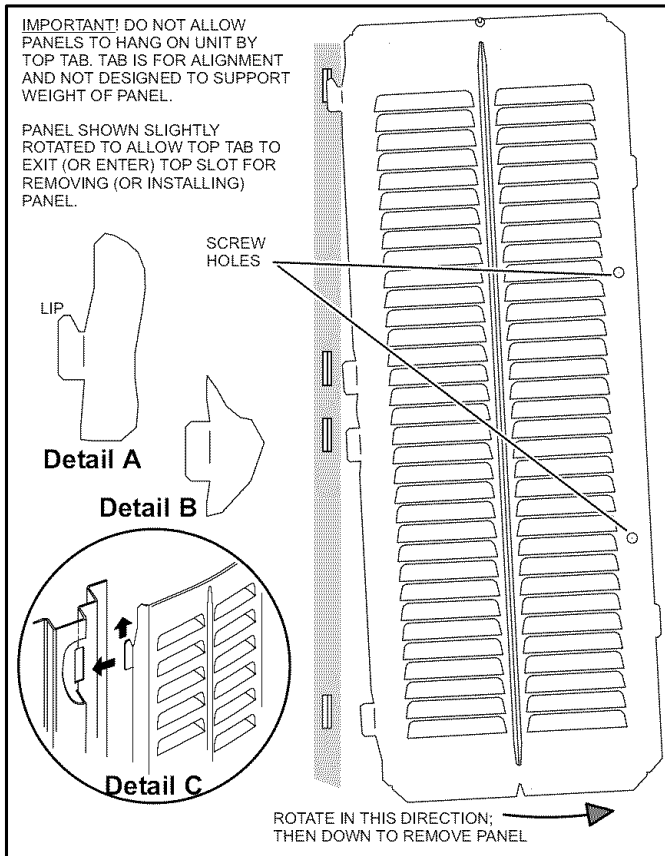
Removing/Installing Louvered Panels (Detail A, B and C)
